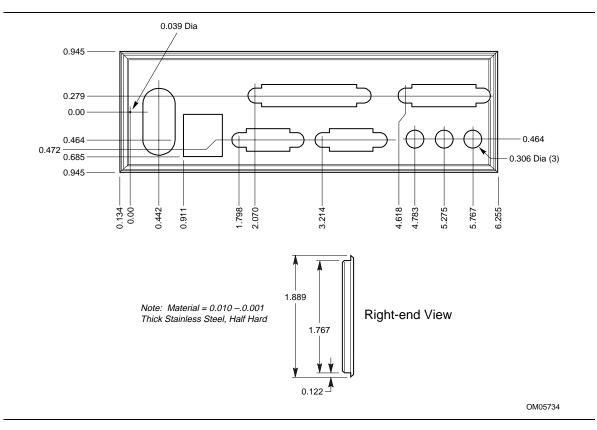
Back Panel I/O Shield Dimensions (ATX/microATX Chassis-Independent)
